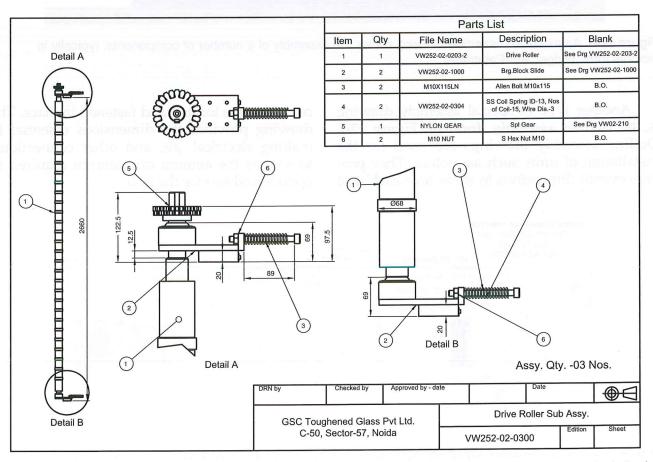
An assembly drawing shows the assembly of two or more parts. A parts list is included. (Autodesk, Inc.)
